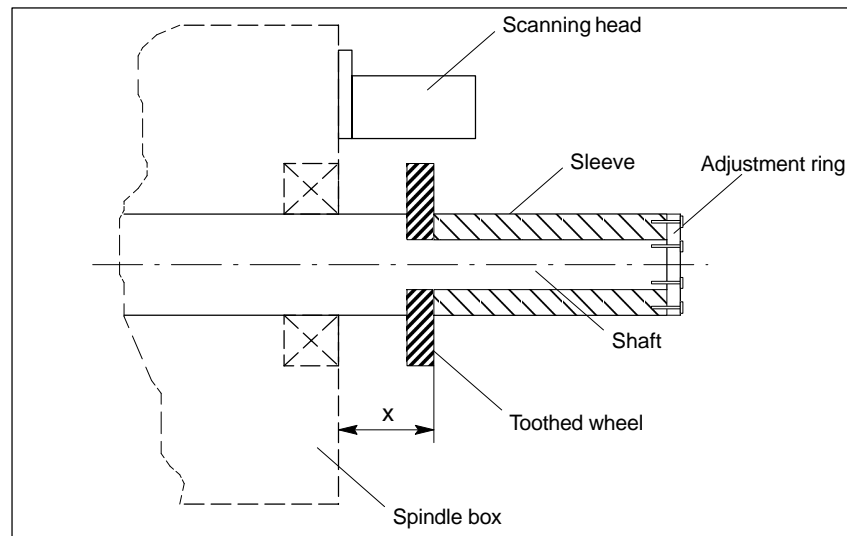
Recommended mounting, toothed-wheel encoder
